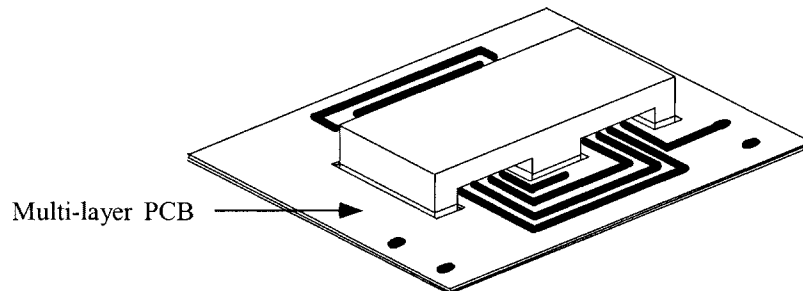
PC Board Planar Transformer in Final Assembly.
